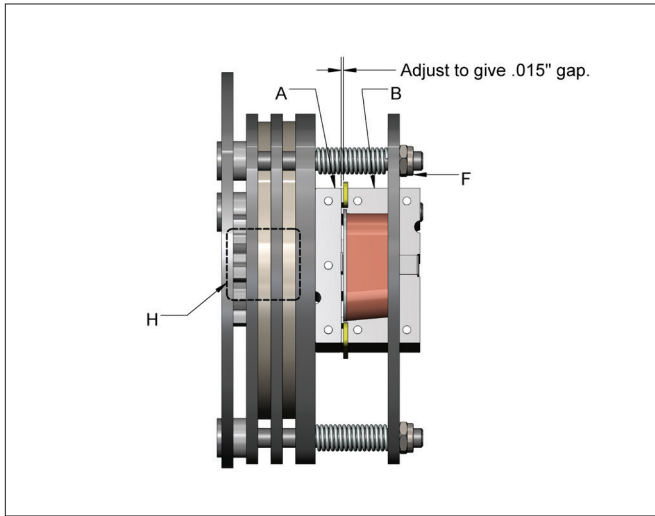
MOTOR BRAKE ADJUSTMENT
